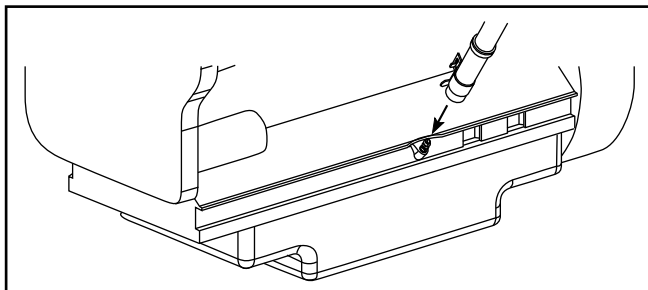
Attaching the Drain Hose to the Insert Fitting
